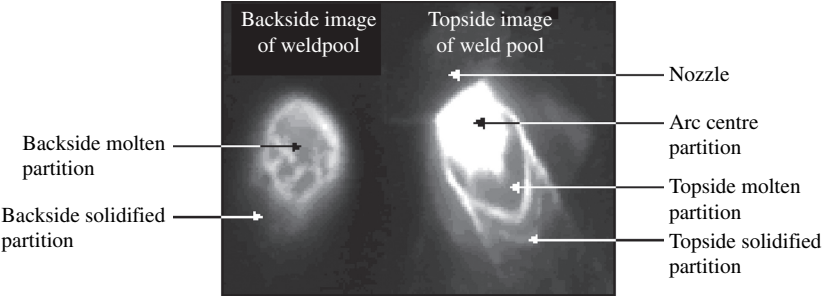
A frame complete weld pool image of pulsed GTAW
